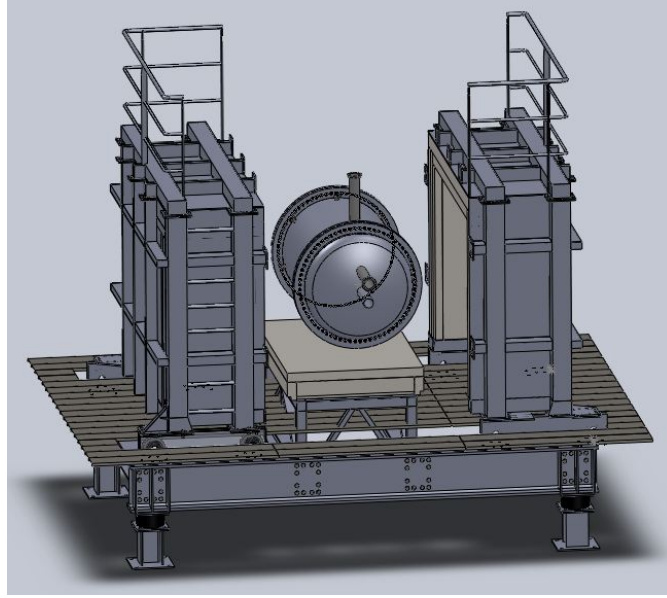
Drawing of the NEXT-100 lead castle shield in its open configuration.
